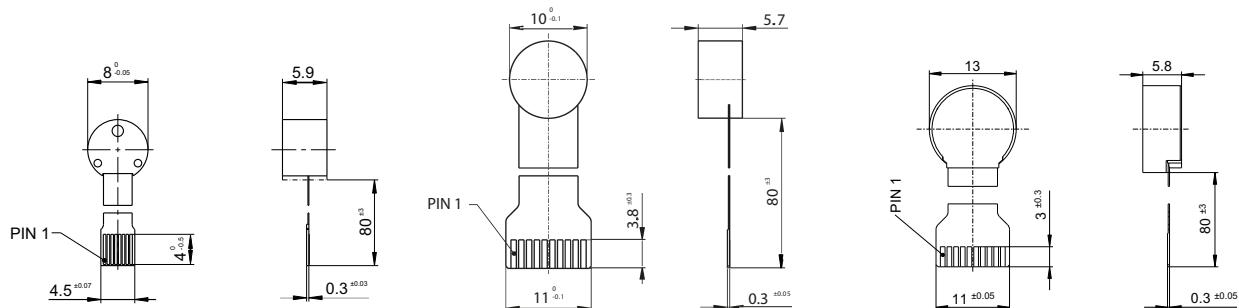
ENX 8/10/13 IMR Flexprint – Dimensional drawing [mm]
